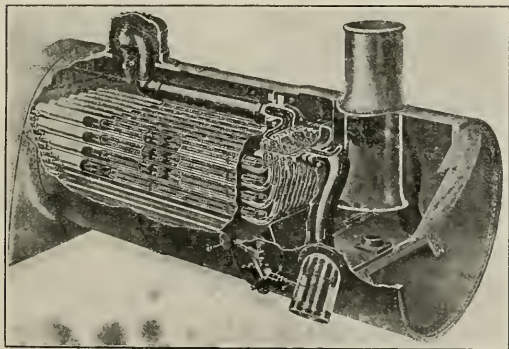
AMERICAN STANDARD LOCOMOTIVE SUPERHEATER, TYPE "A" EQUIPMENT
